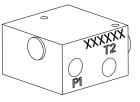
View of P1 & T2 Side of Flow Valve Identification Markings
